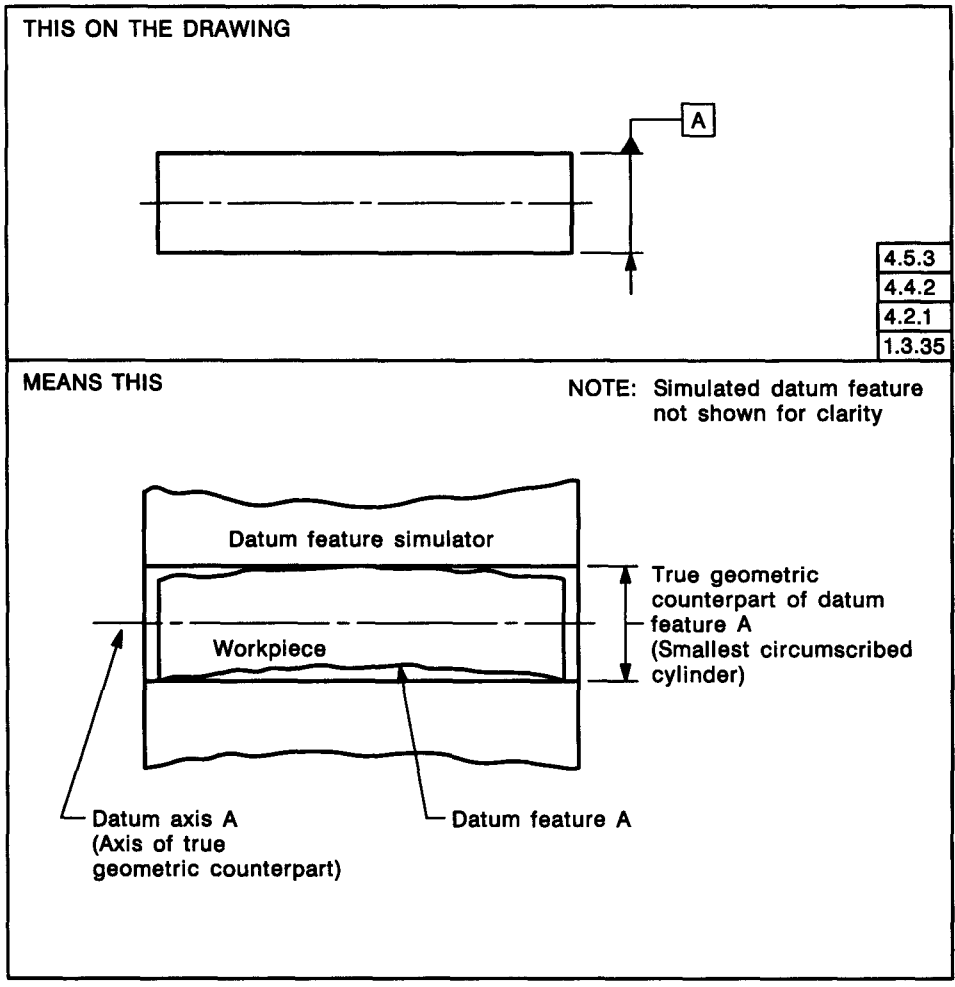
PRIMARY EXTERNAL DATUM DIAMETER — RFS
